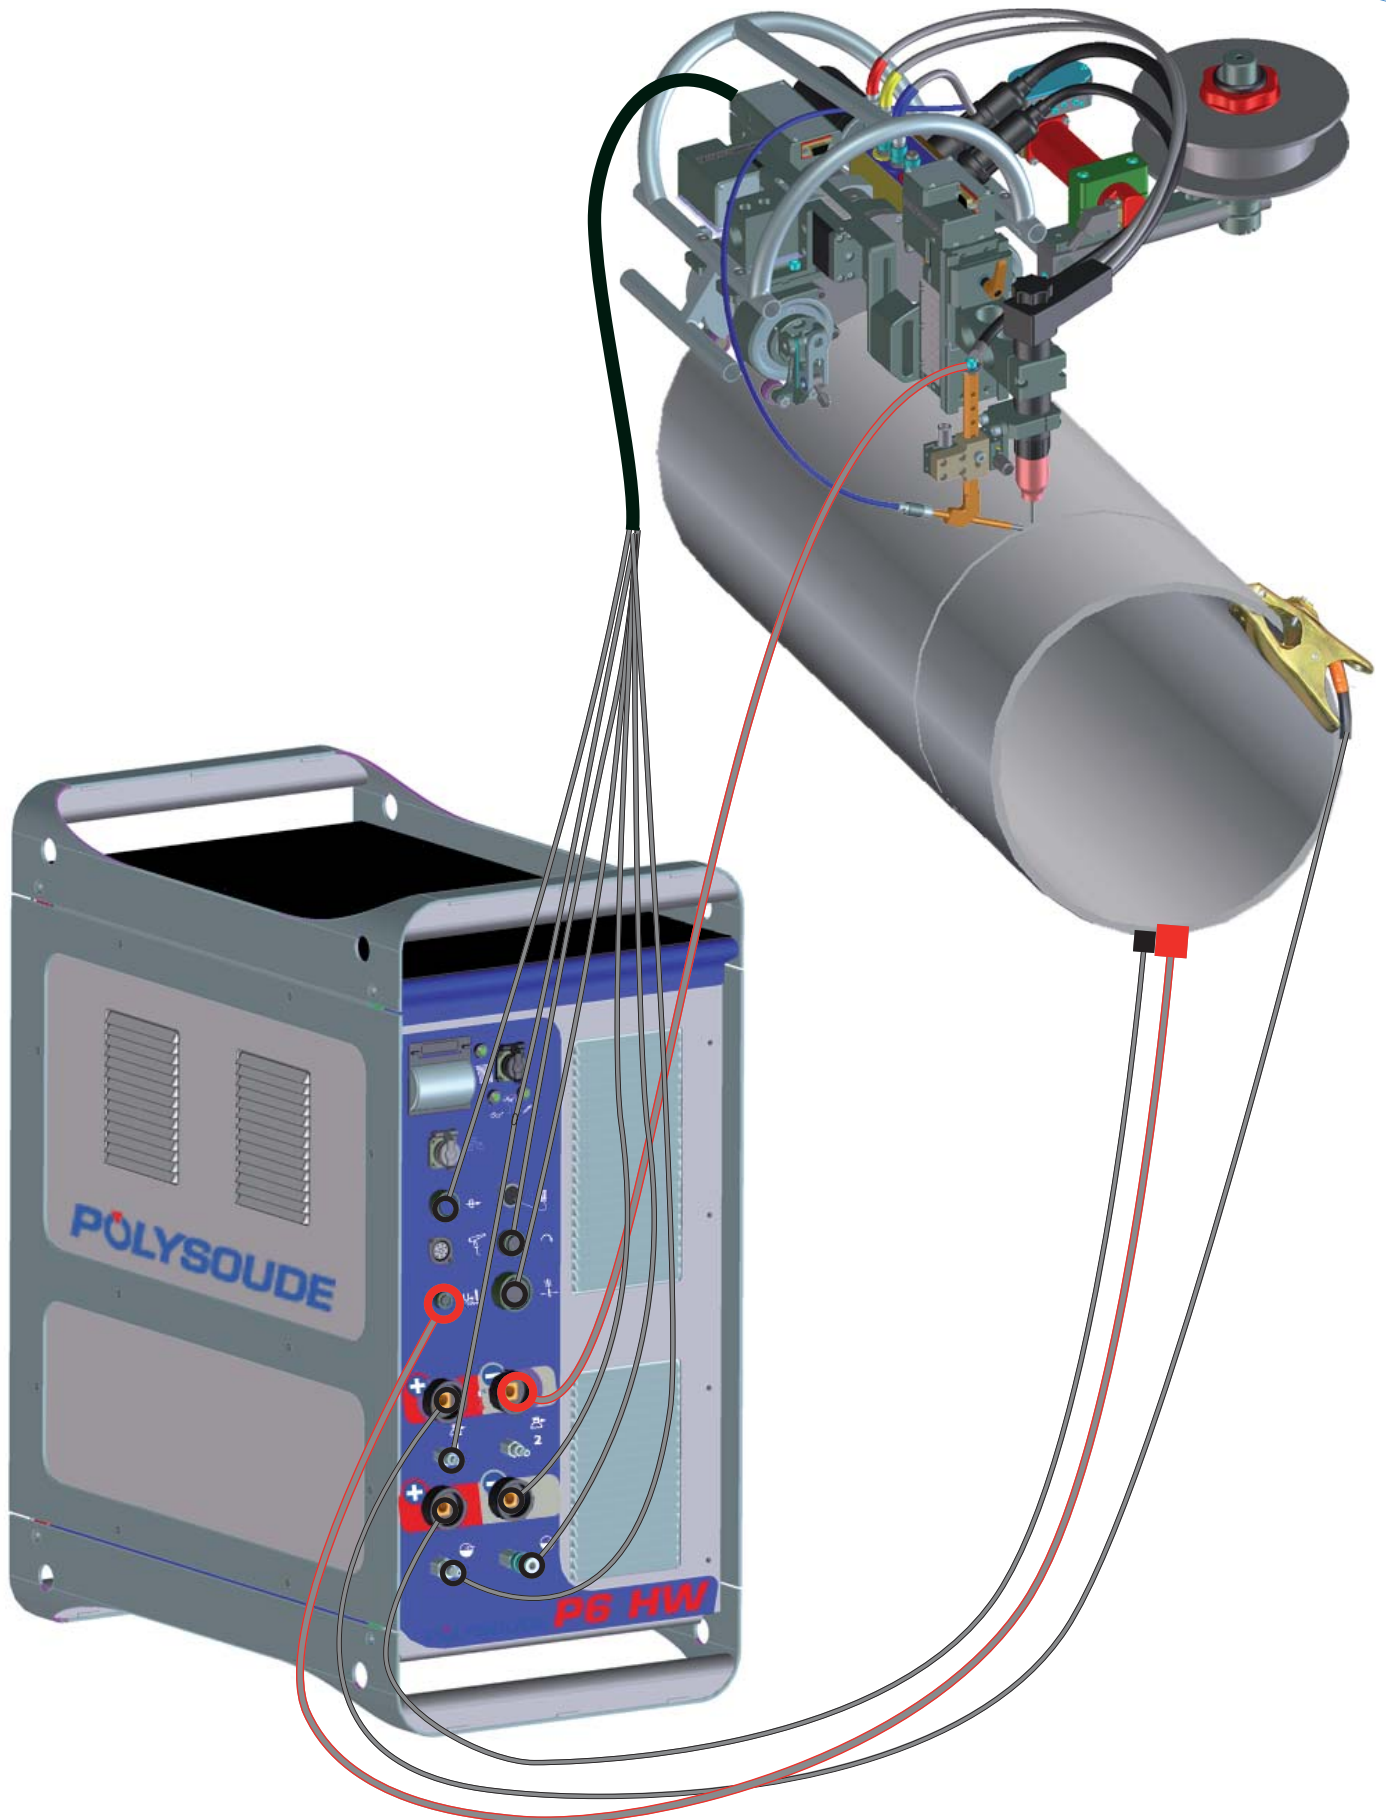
Connection of a "Polycar hot wire" type head
